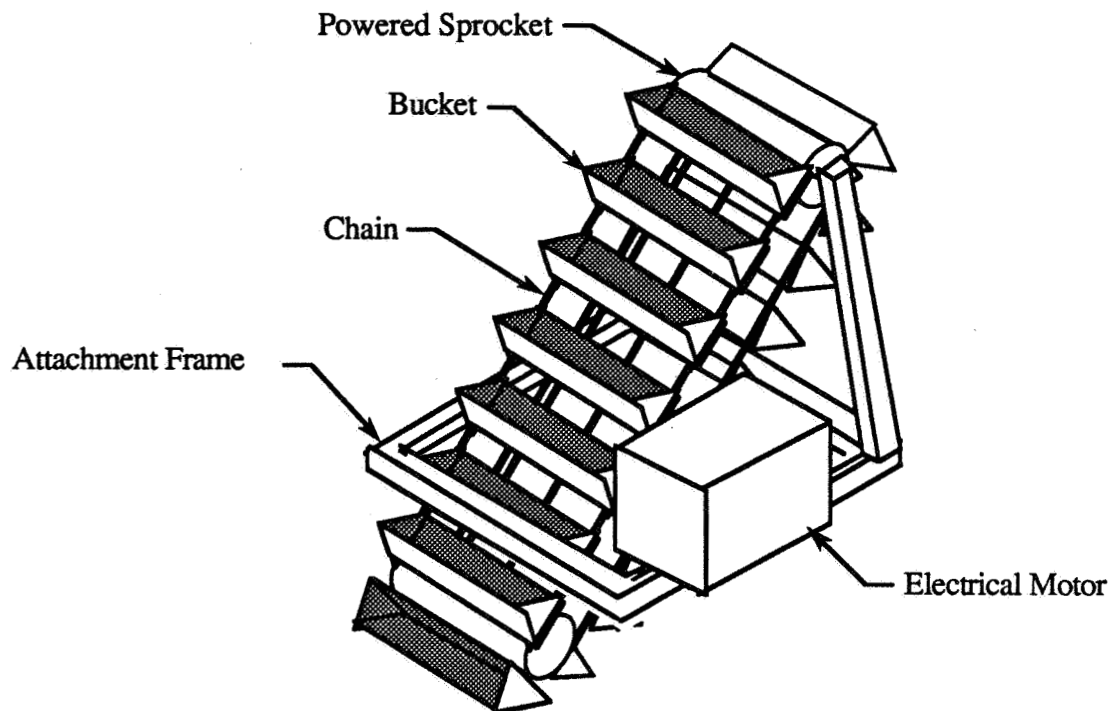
CONFIGURATION OF BUCKETWHEEL CONVEYOR
